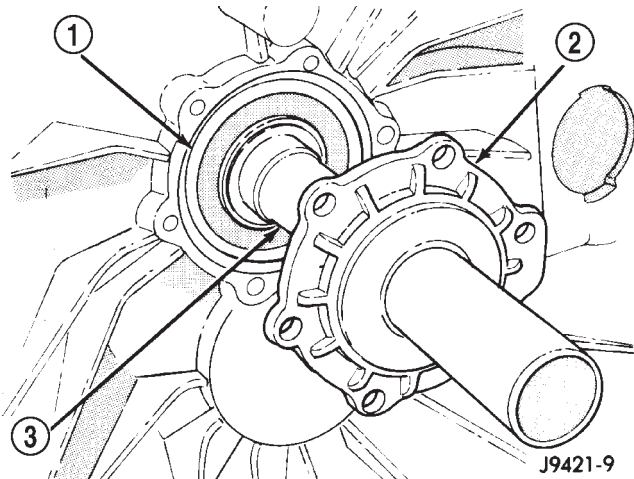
Input Shaft Bearing Retainer Removal—Typical
